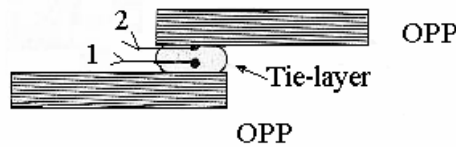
Placement of thermocouples in the weld specimen [15]
